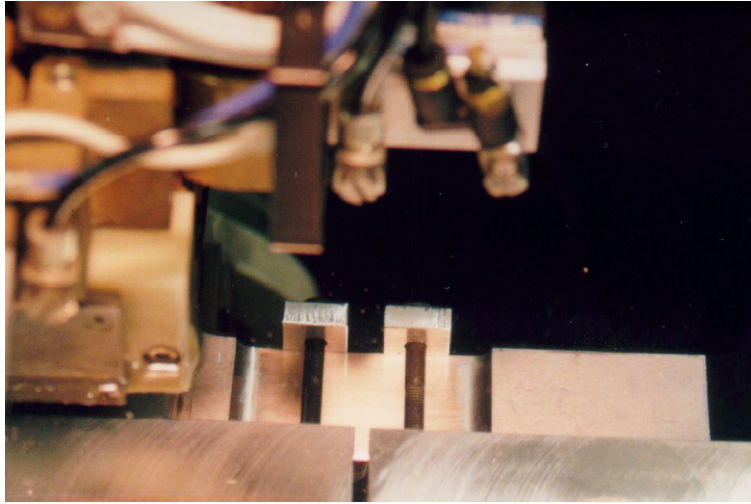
Beam B was clamped on both sides of the cut prior to EDM cutting.
